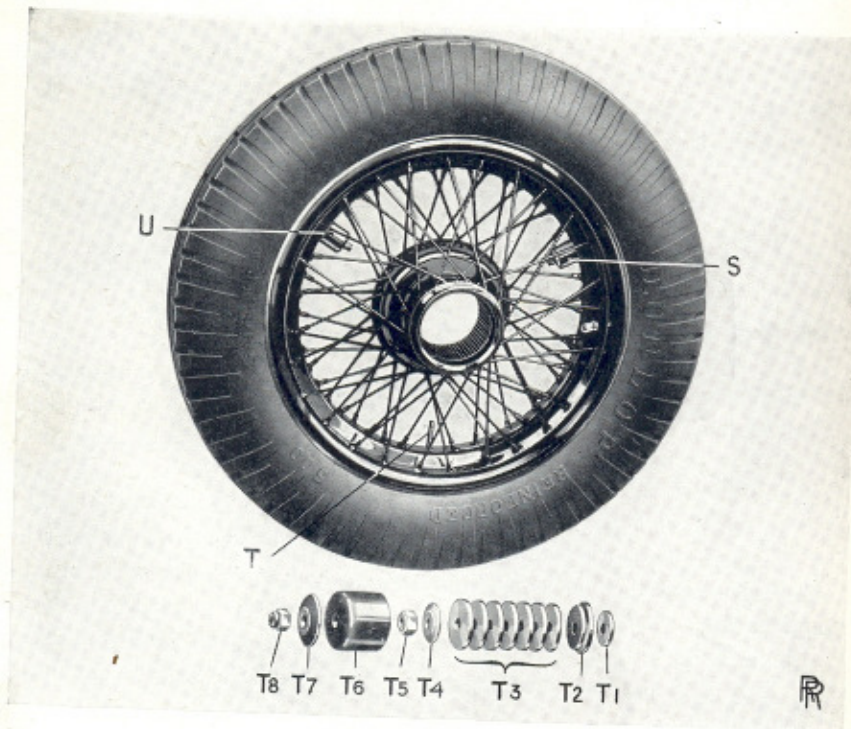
WIRE WHEEL WITH BALANCE WEIGHTS.
